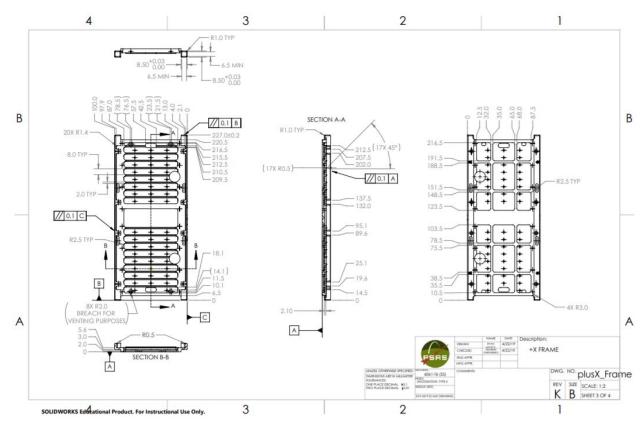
2 of 3 Dimensioned Drawing of the plus X OreSat Frame
